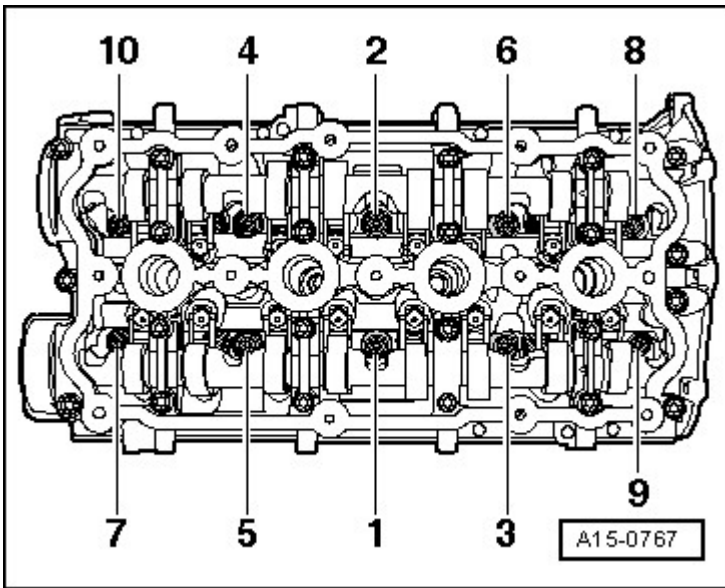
Identifying Cylinder Head Bolts Tightening Sequence
